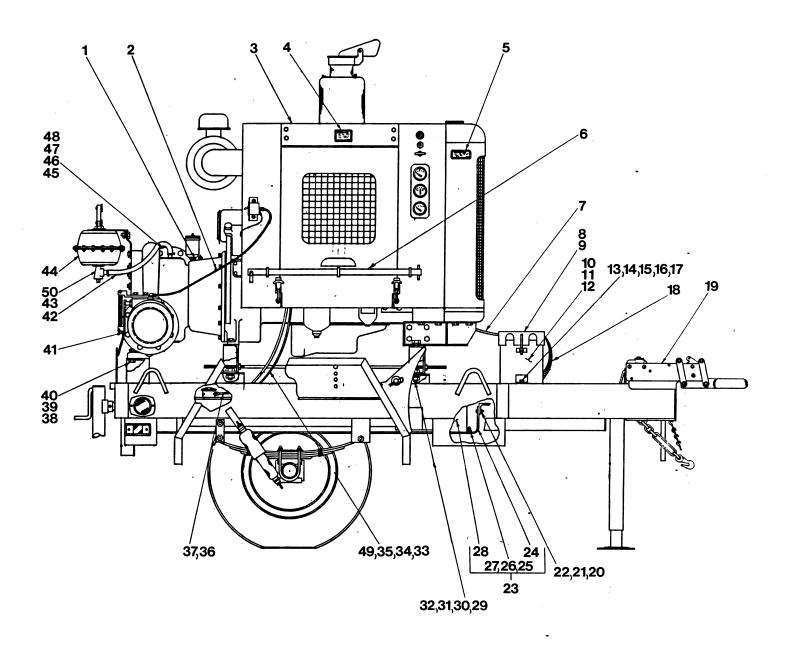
Pump Model Assembly 55M2-5044-HT/S1
